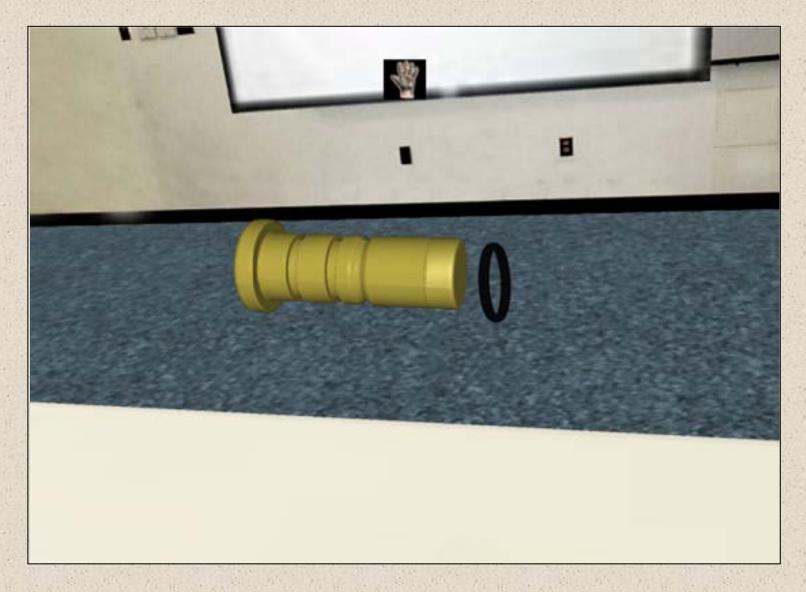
Rubber o-ring must be rolled on top of the rightmost rectangular groove.
